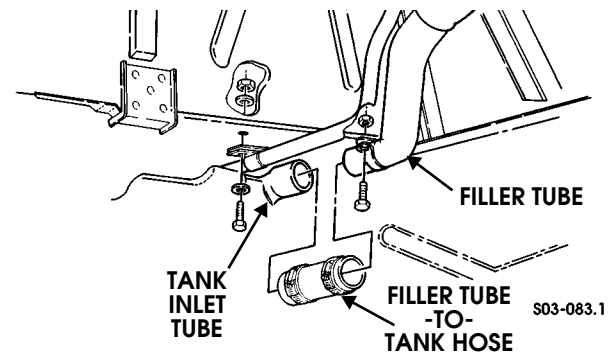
Filler Tube-To-Tank Attachment (All)
